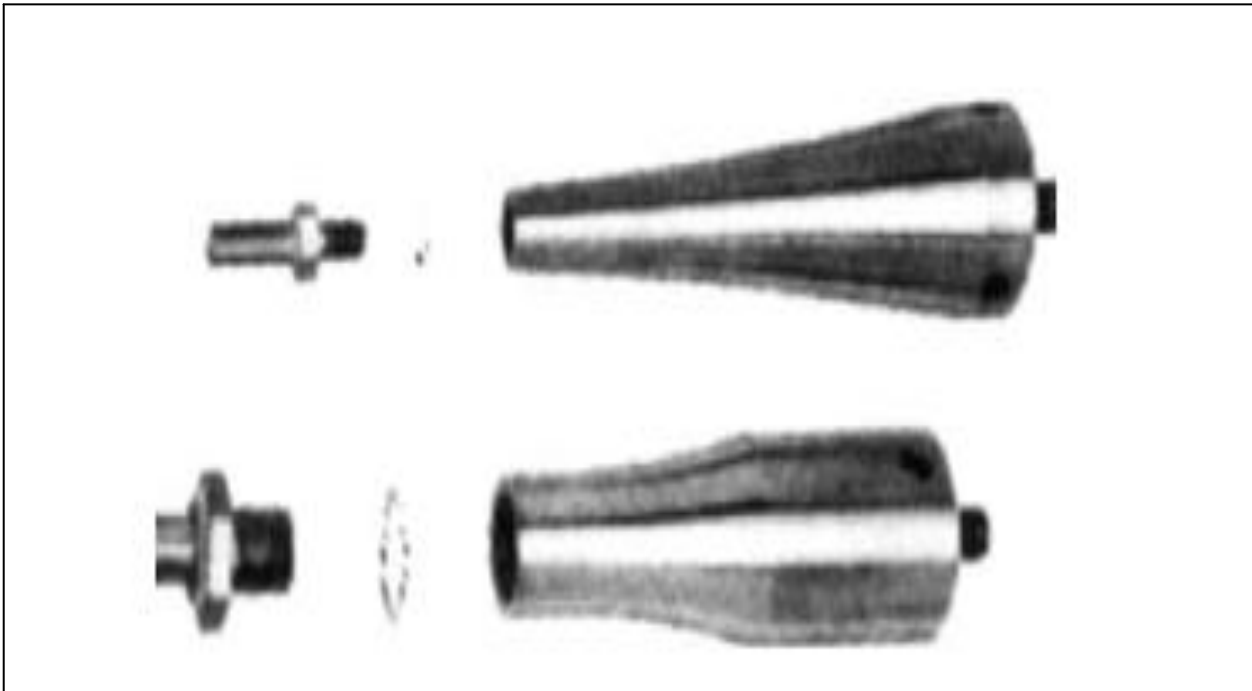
Amplifying tool holders and mechanically attached tools used for USM [Singh and Khamba 2006].
